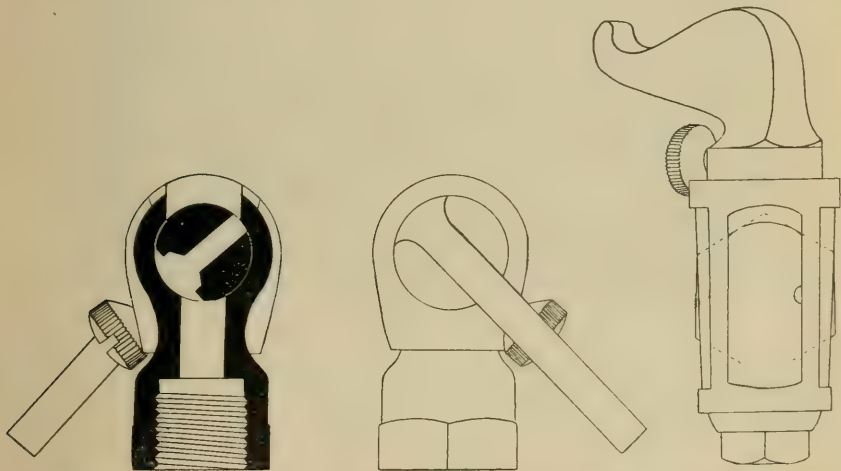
Drawing, showing construction and exterior views of a Bordeaux nozzle. Natural size. (Courtesy Prof. C. W. Woodworth, Cal. Agrcl. Exp. Sta.)
